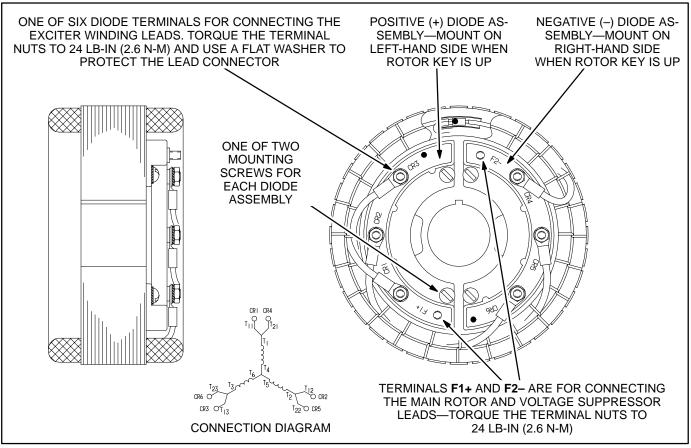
ROTATING RECTIFIER ASSEMBLY
